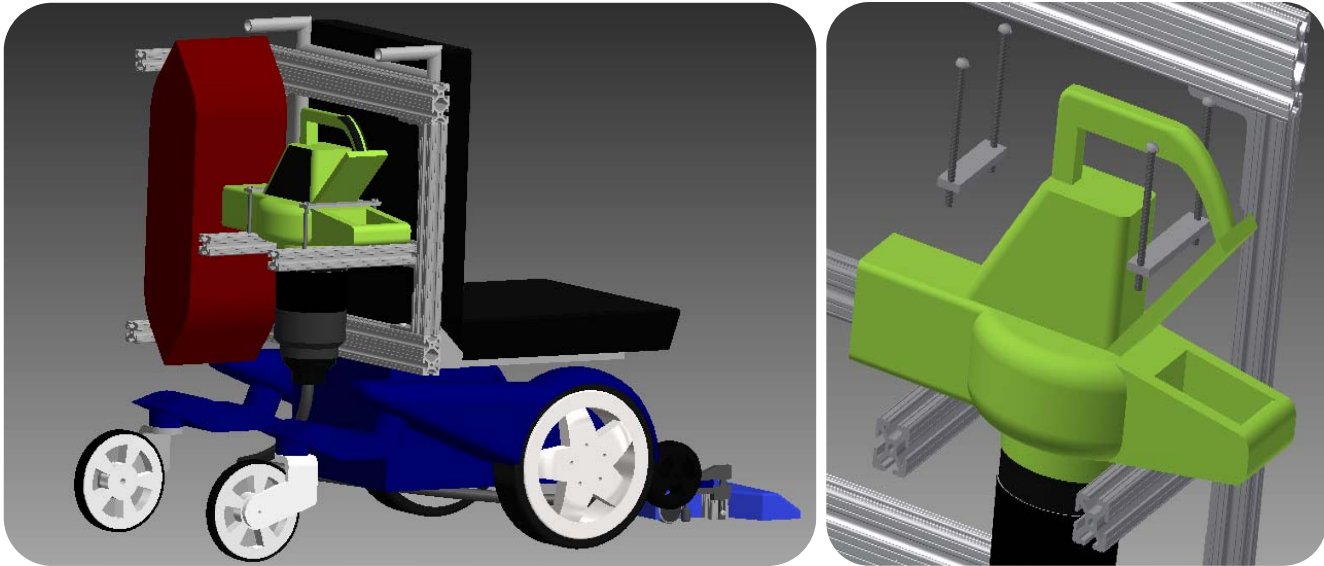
CAD of wheelchair, 80/20 aluminum frame and vacuum attachment (left) Close-up of vacuum mounting system (right).
